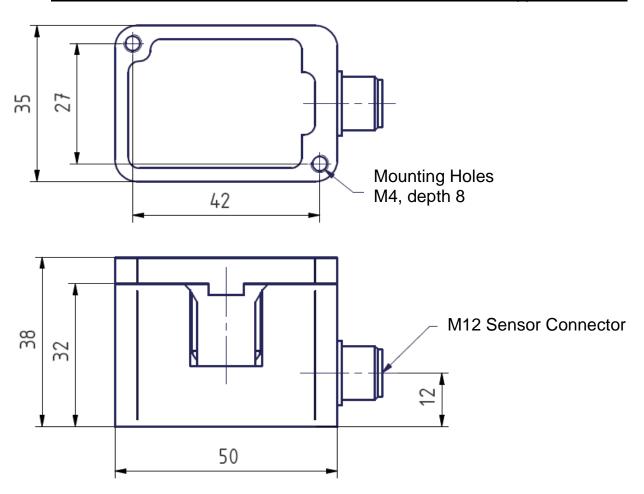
Drawing of sensor model L Note: The drawings do not conform to real dimensions
